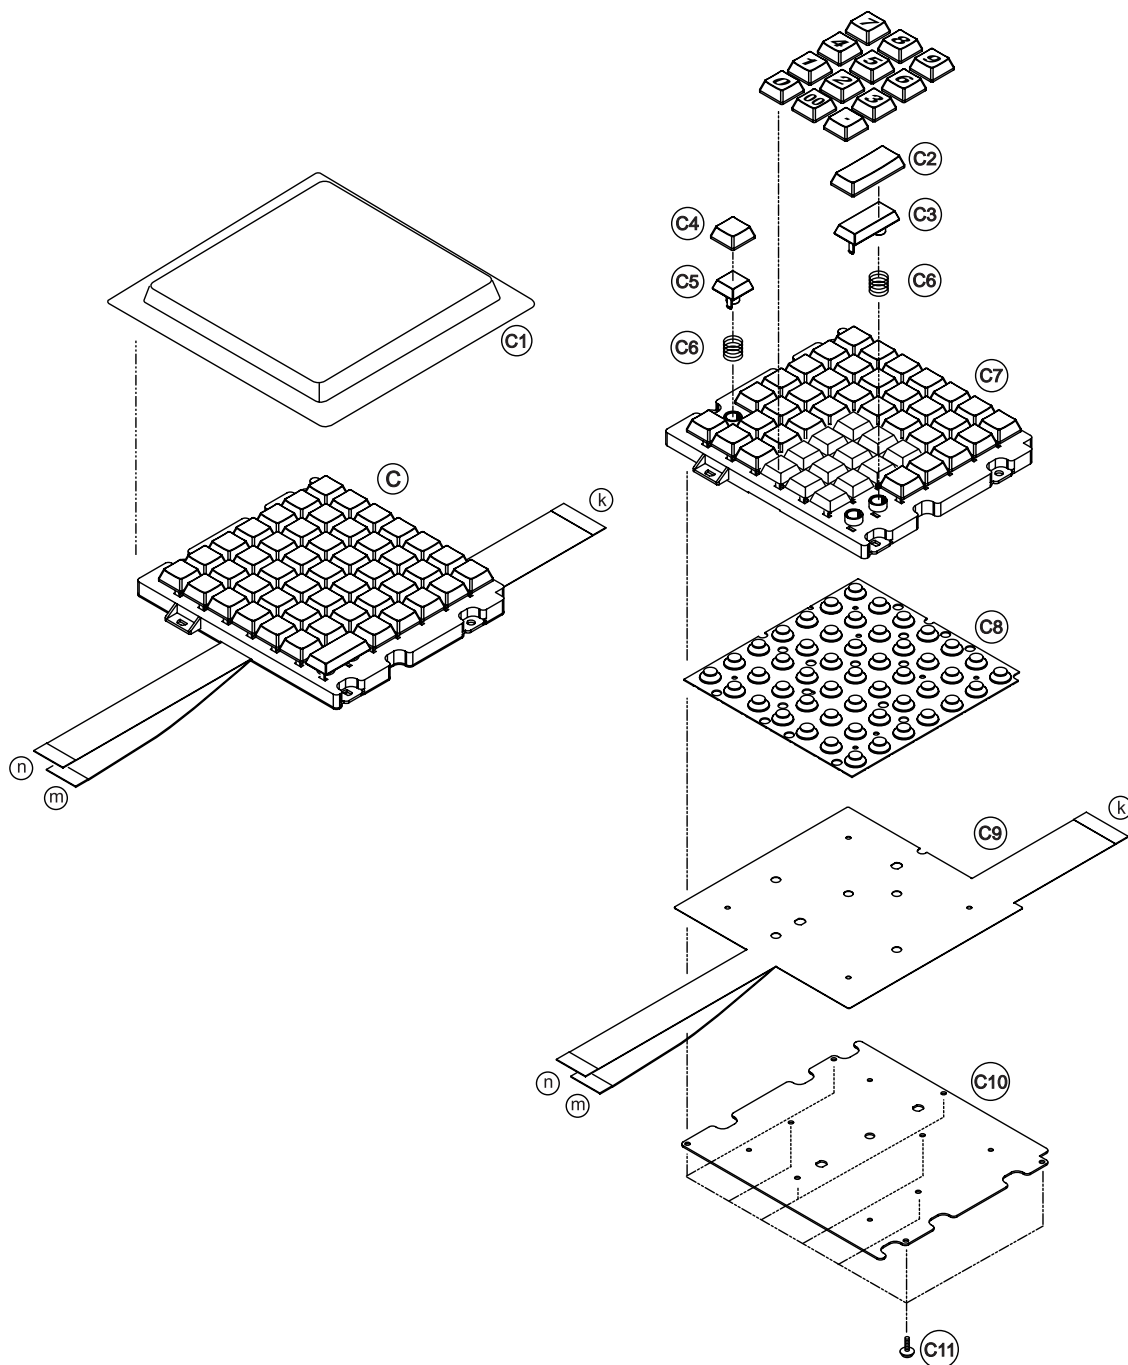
ASS'Y KEY BOARD(RAISED)
